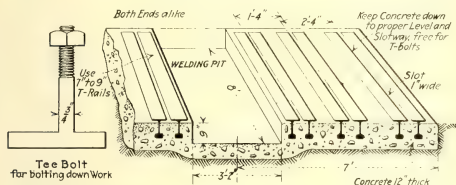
THERMIT WELDING BED, 14 FT. LONG, 8 FT. WIDE
